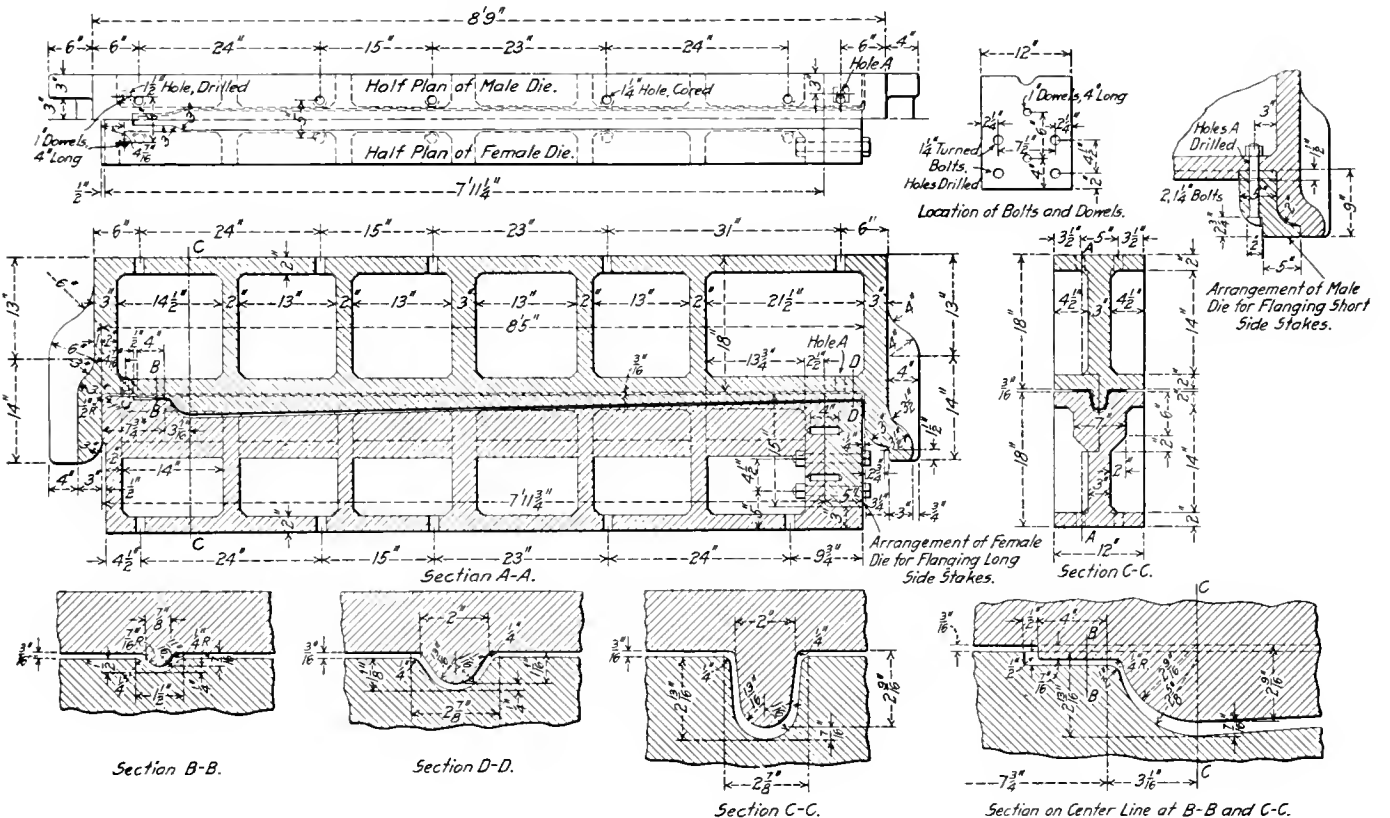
Formers for Side Stakes of a Steel Hopper Car.
